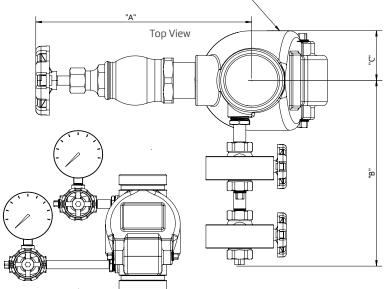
CVR-A UL/FM Grooved Riser Check Valve
